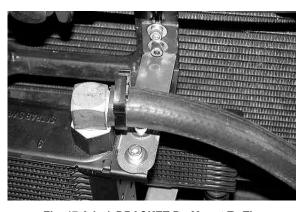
A-b / BRACKET B - Mount To The Upper Driver's Side Tab.
